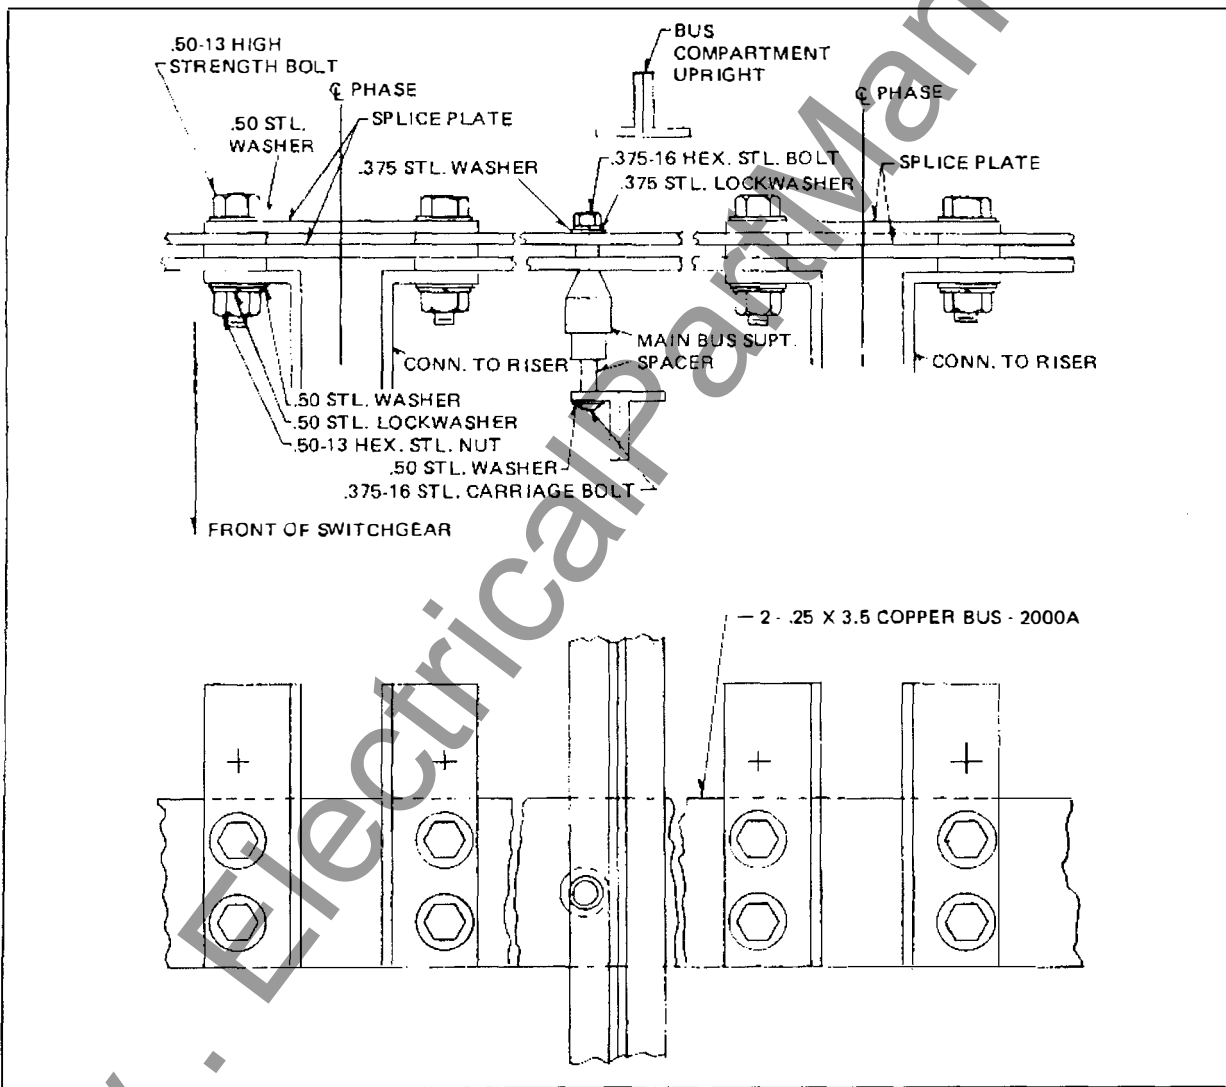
Field Assembly of Joints 2000 Amp Bus
